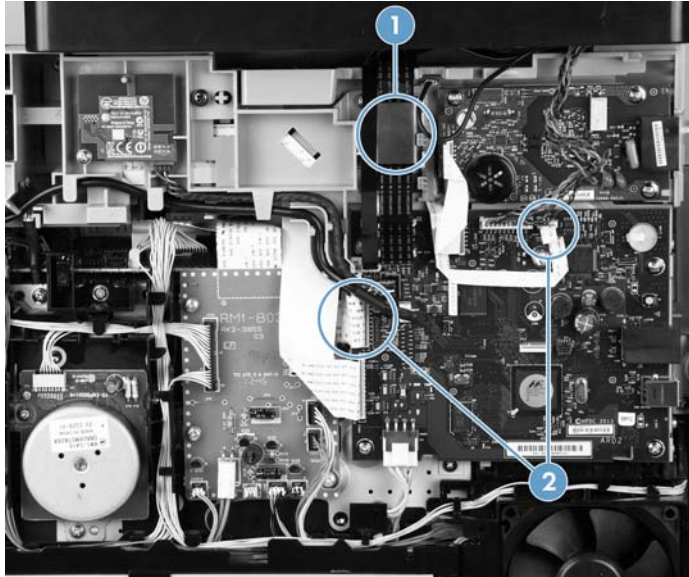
Remove the rear-door rib assembly (3 of 3)
